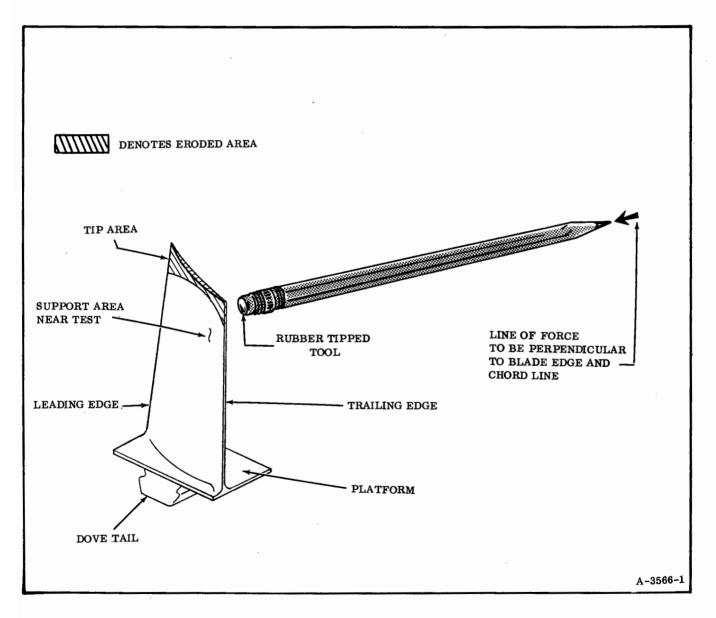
Erosion Test for Blades and Fixed Vanes
